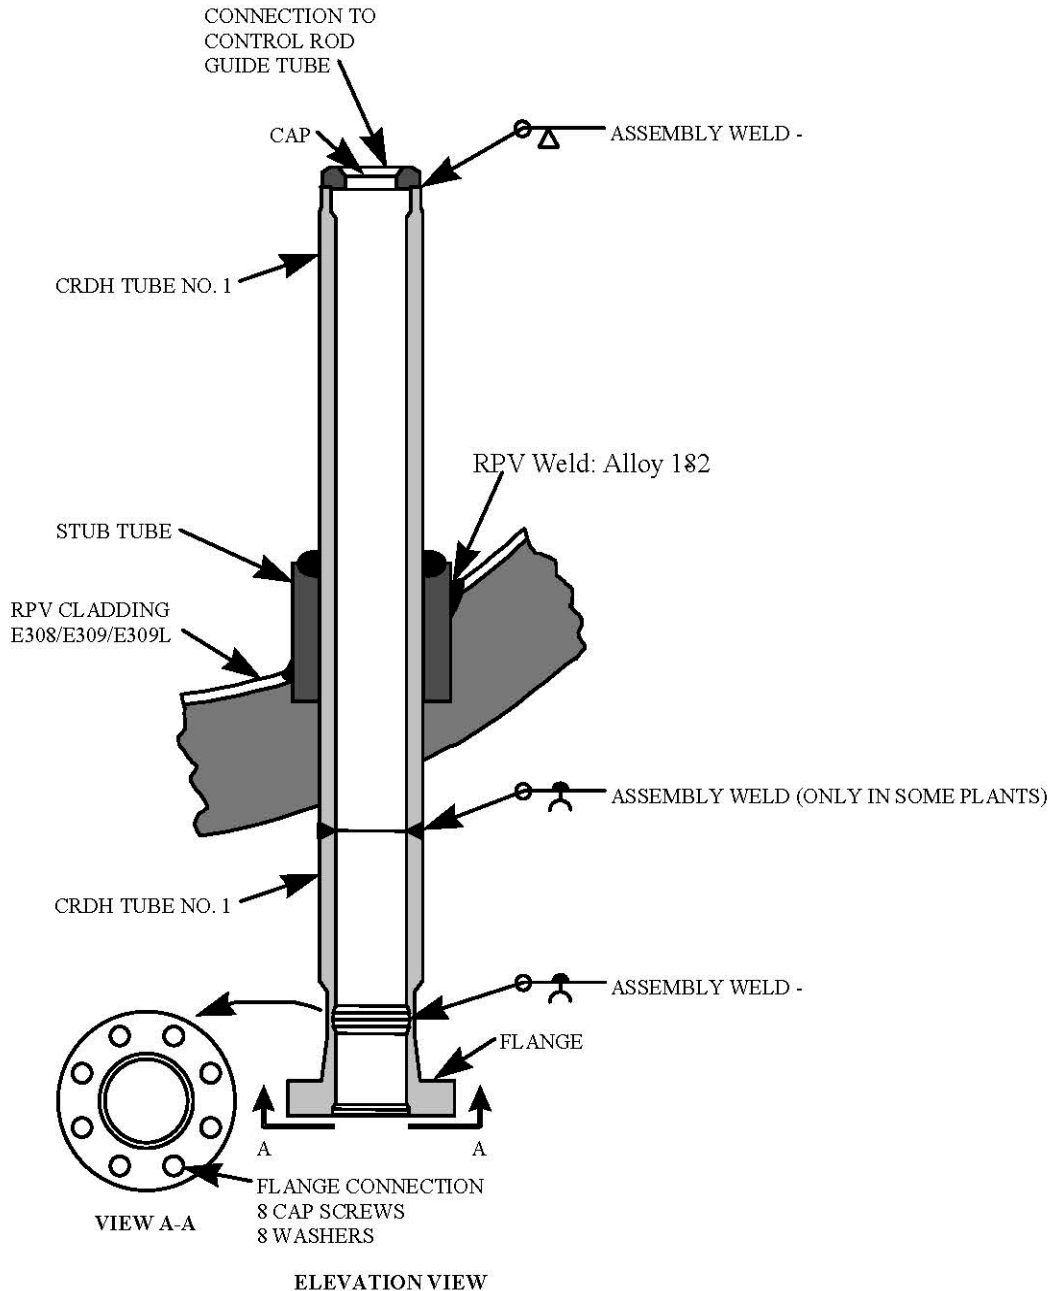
Typical CRD stub tube and CRD housing configurations. Alloy 182 used in stub tube to RPV weld.
